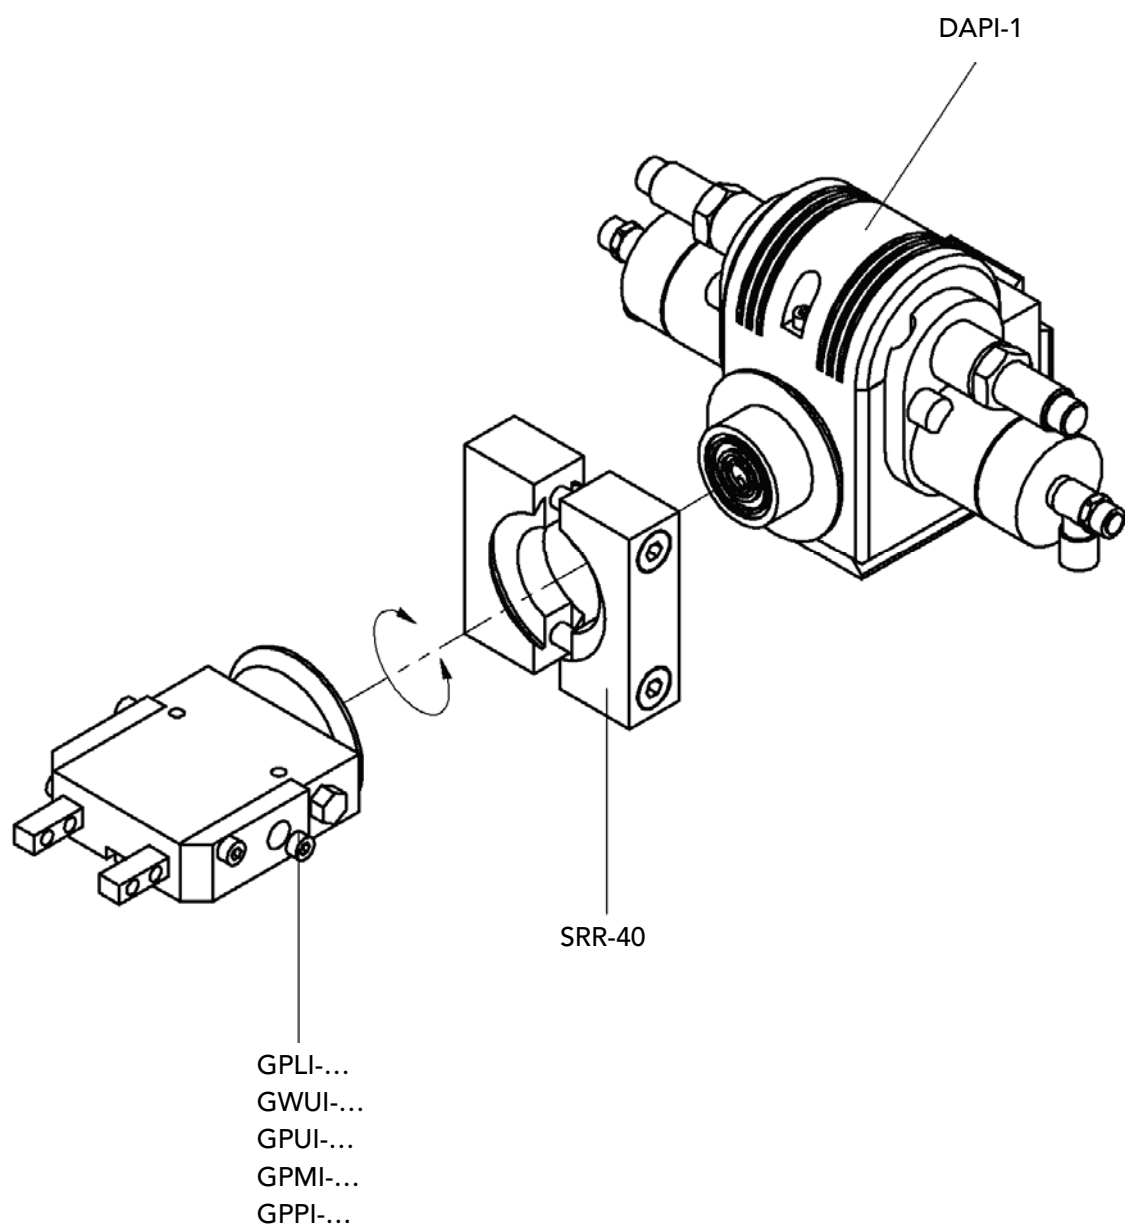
Gripper axis perpendicular to the axis of rotation
